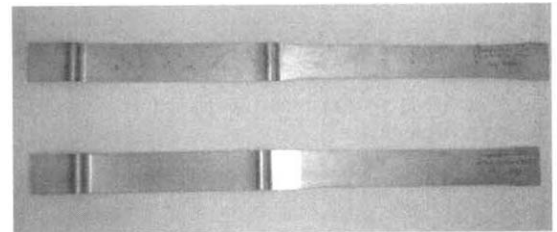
Necking view of GA steel sheets(SGACEN thickness 0.7 mm) for rectangular bead.
